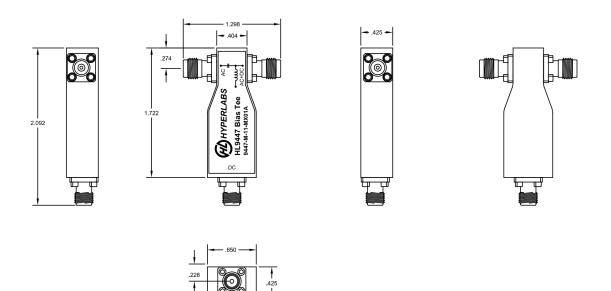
HL9447 with SMA DC bias port Mechanical Drawing
